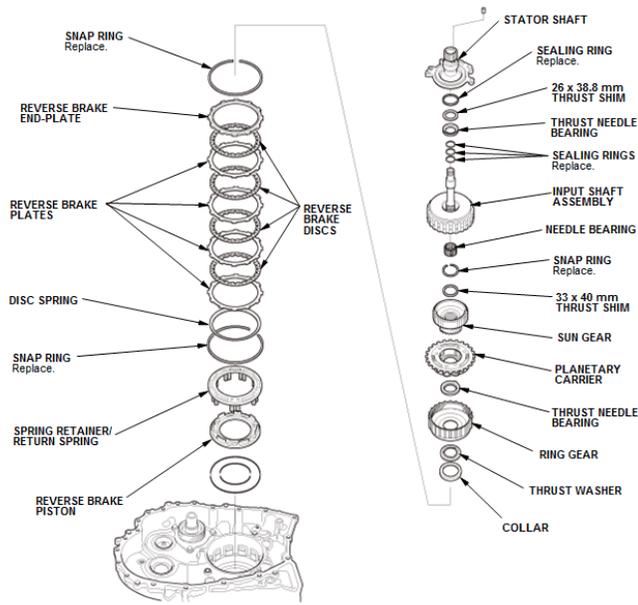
Exploded View Of Transmission (AWD) (1 Of 2)
